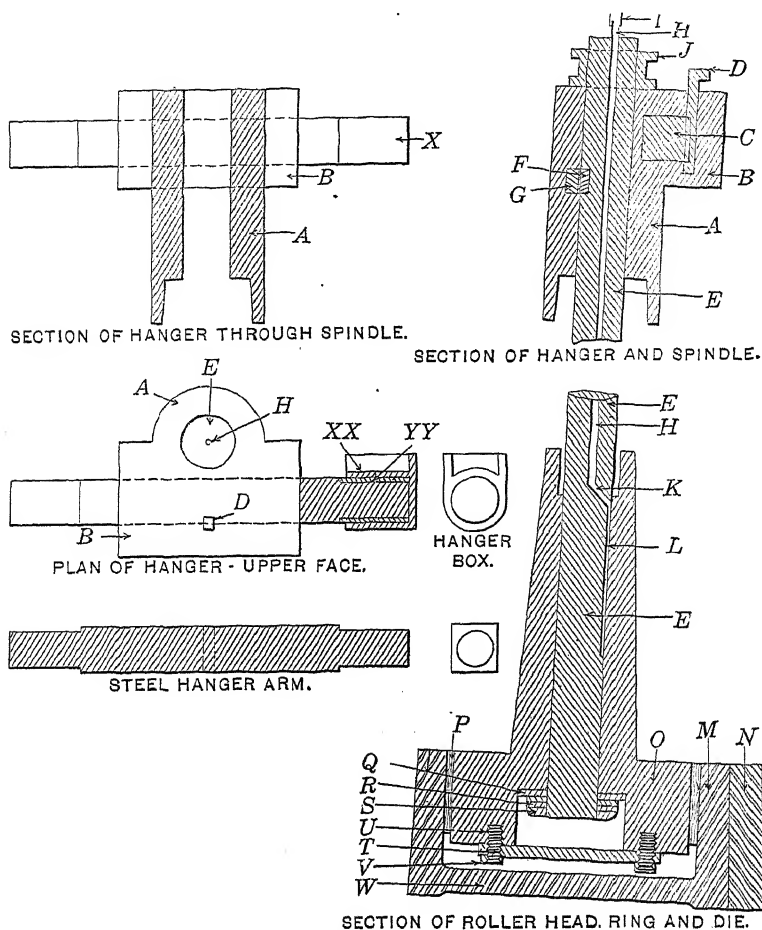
HUNTINGTON MILL. DETAILS OF CONSTRUCTION.
